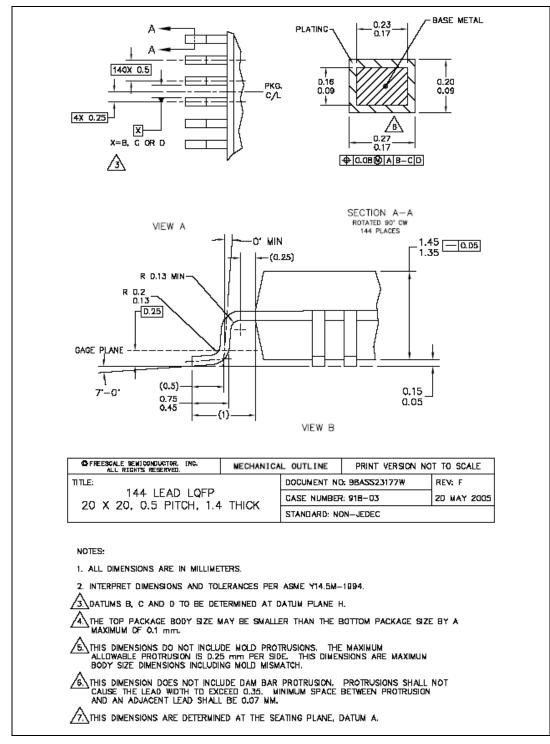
144 LQFP package mechanical drawing (Part 2 of 2)
